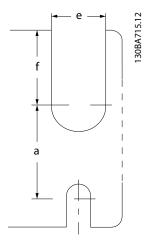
Top and Bottom Mounting Holes (B4, C3, C4)
